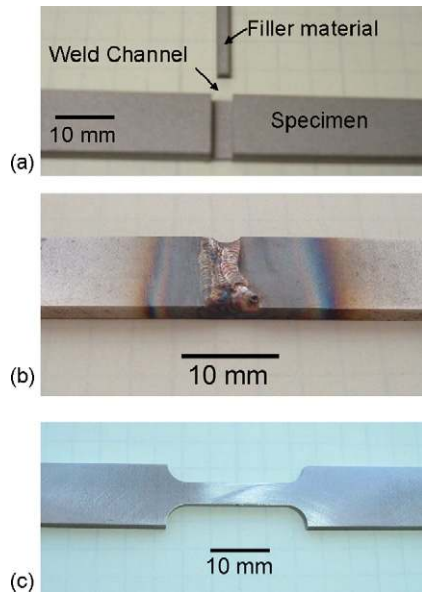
(a) Geometry of the filler material and the tensile test specimen. (b) Welded specimen. (c) Welded specimen after removal of start–stop effects.
